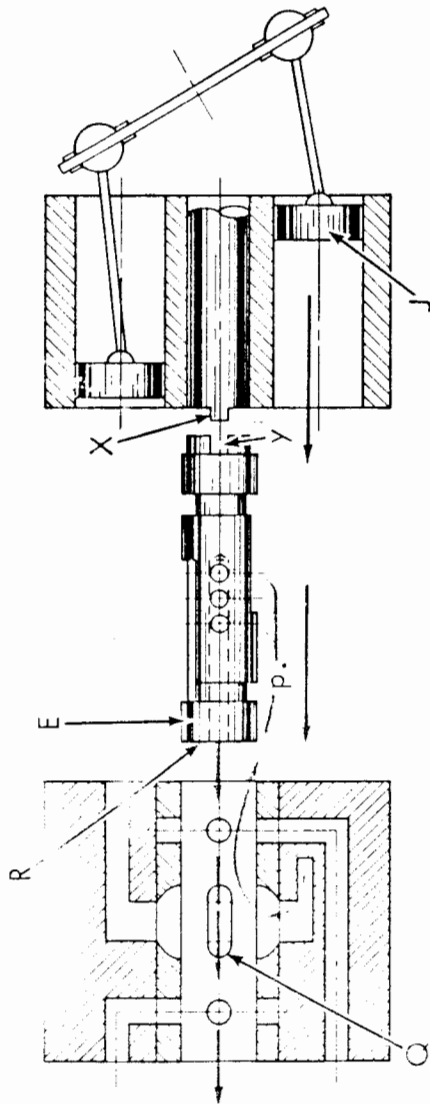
Following primary exhaust of pressurized air used for driving piston in as illustrated in Fig. 5-12. (Courtesy of Gardner-Denver Co.)
